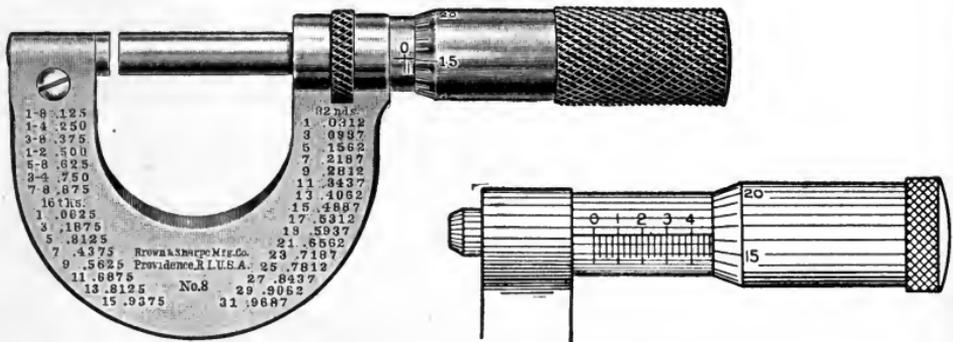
Ordinary Micrometer Caliper Showing Typical Reading
